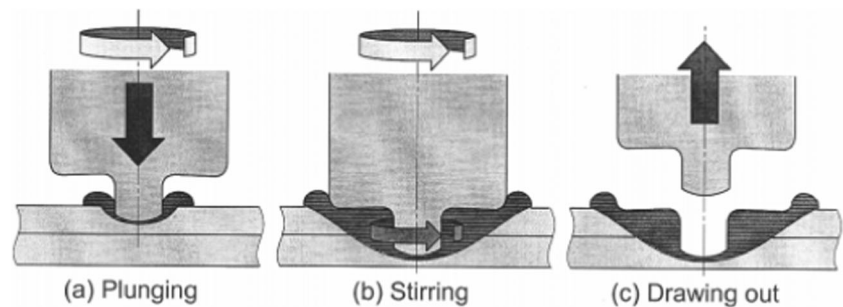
Illustration of the friction stir welding process [20]
